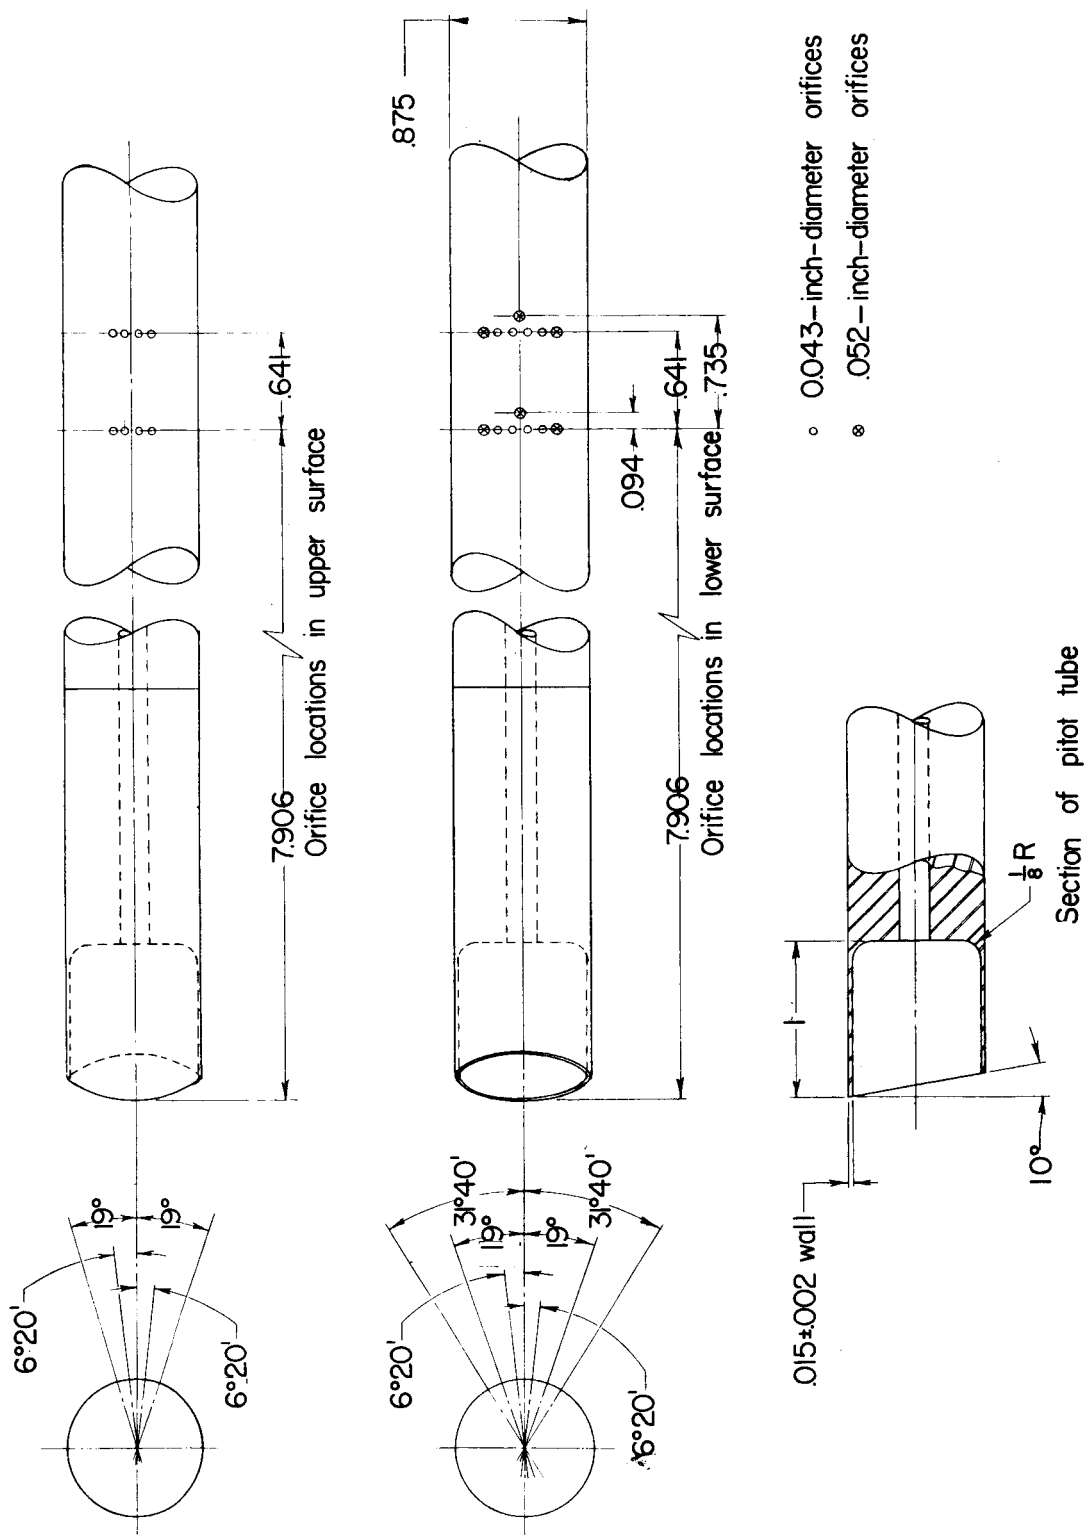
Details of pitot-static tube. All dimensions are in inches.
